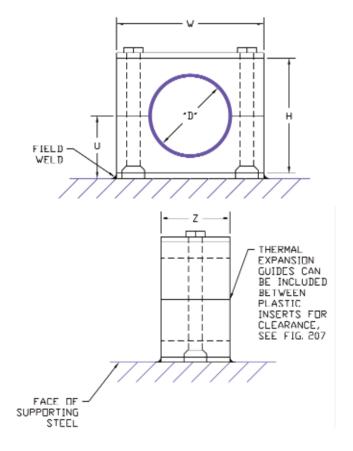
Smooth Bore Weld Plate Mount - Part Number Configurator
